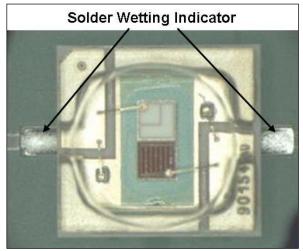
Solder pad with solder wetting indicator (e.g. OSRAM OSTAR Compact)
